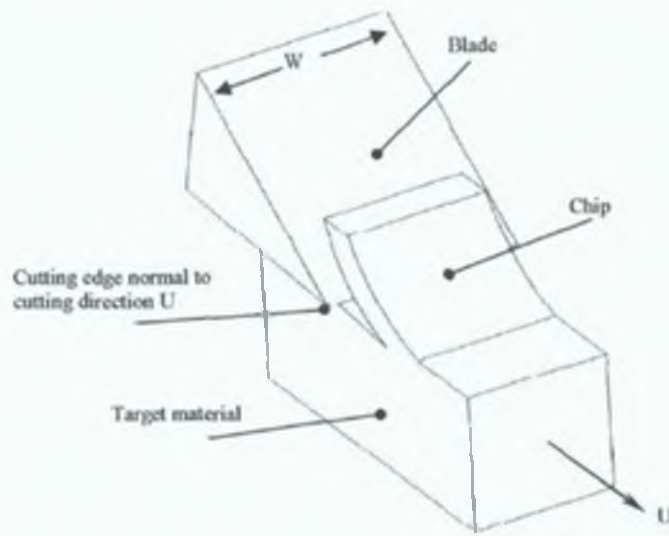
Orthogonal cutting; the cutting tool has a plane cutting face and a single, straight cutting edge. (Oxley P.L.B., 1989)
